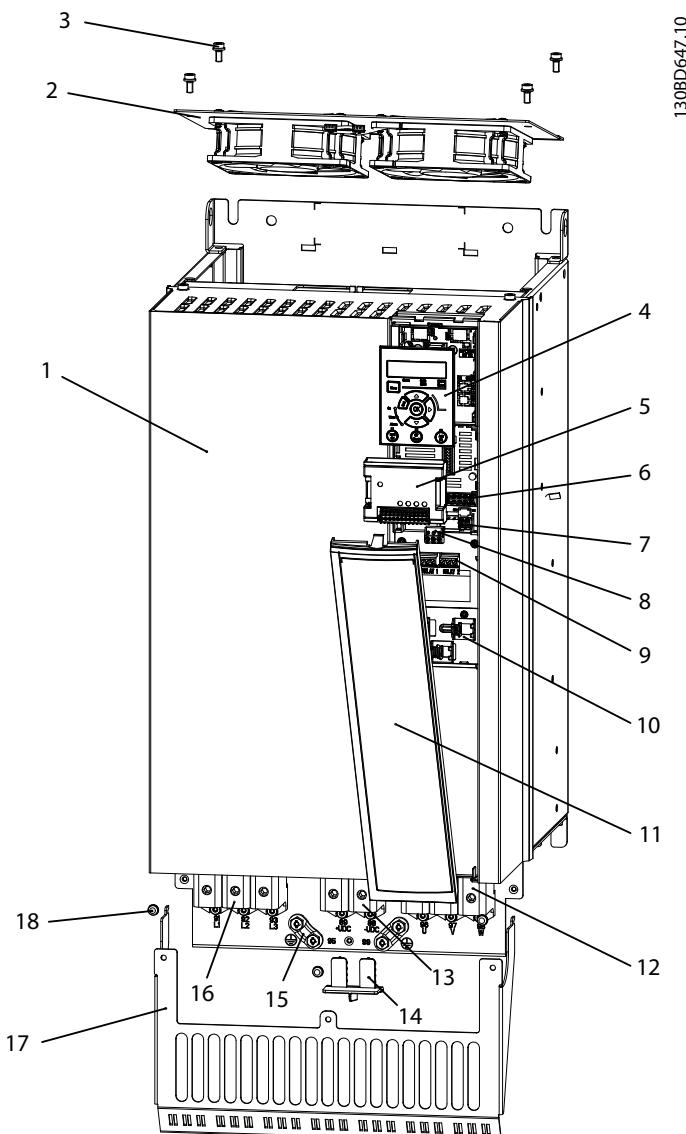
Exploded View J7 (55 kW, 75 kW), IP20
